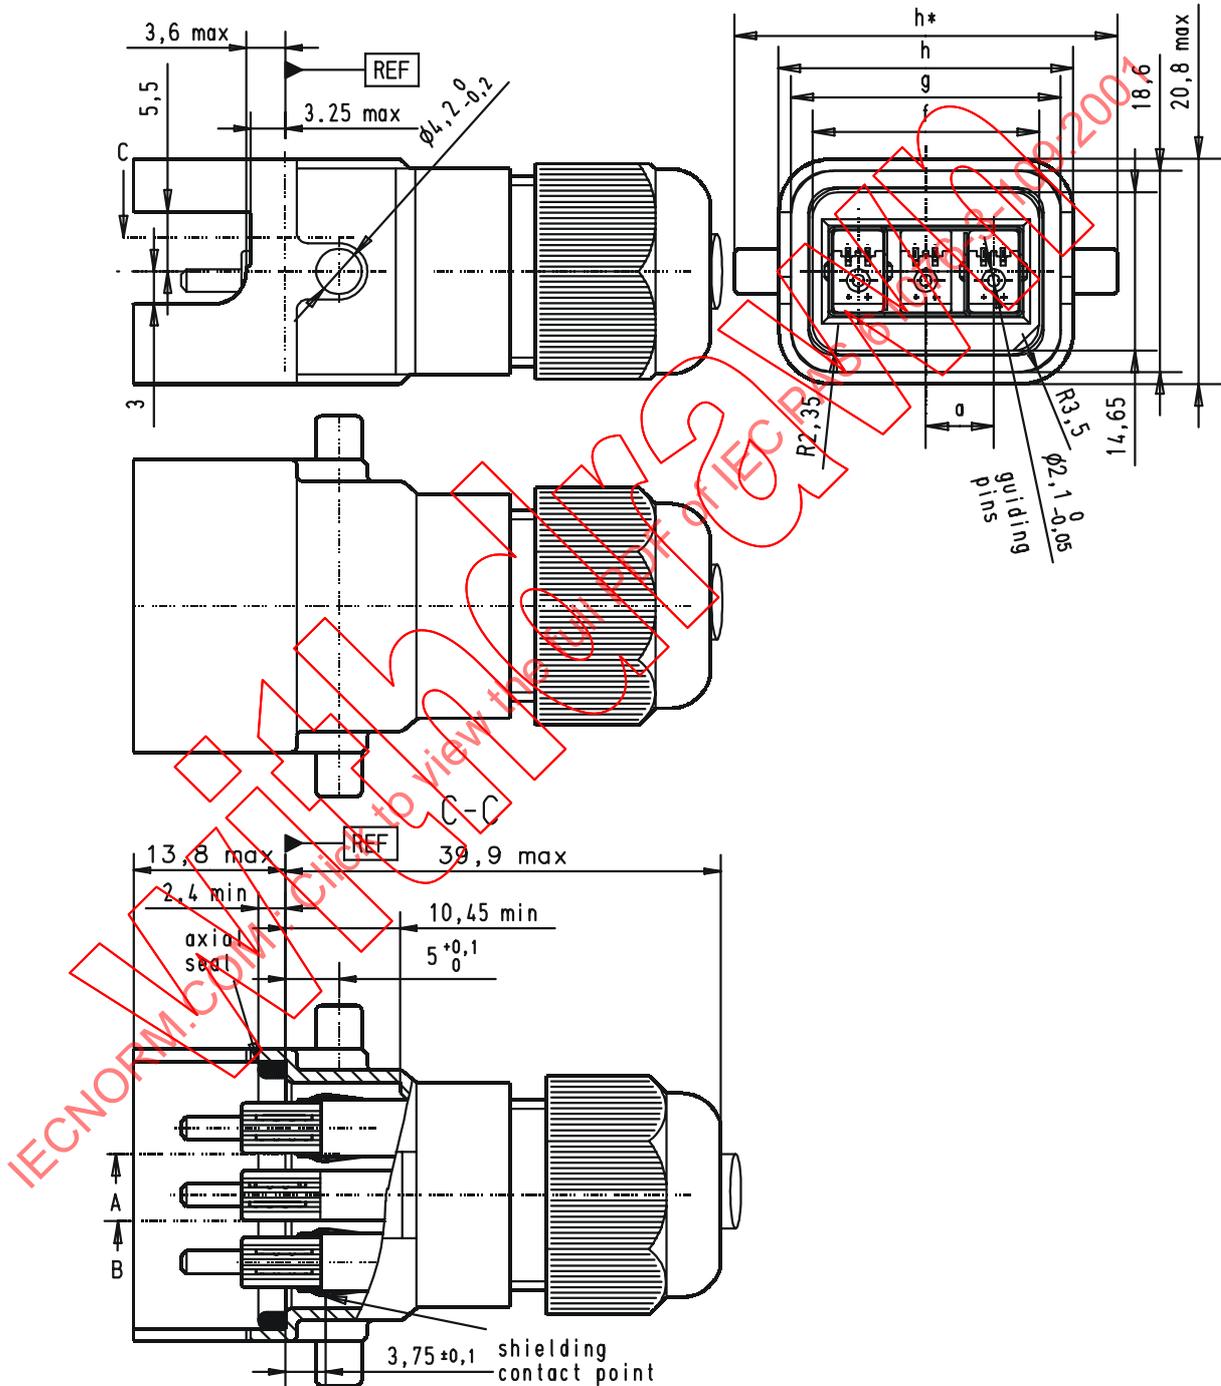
Free connector with housing, shielding, insulation body and contacts
